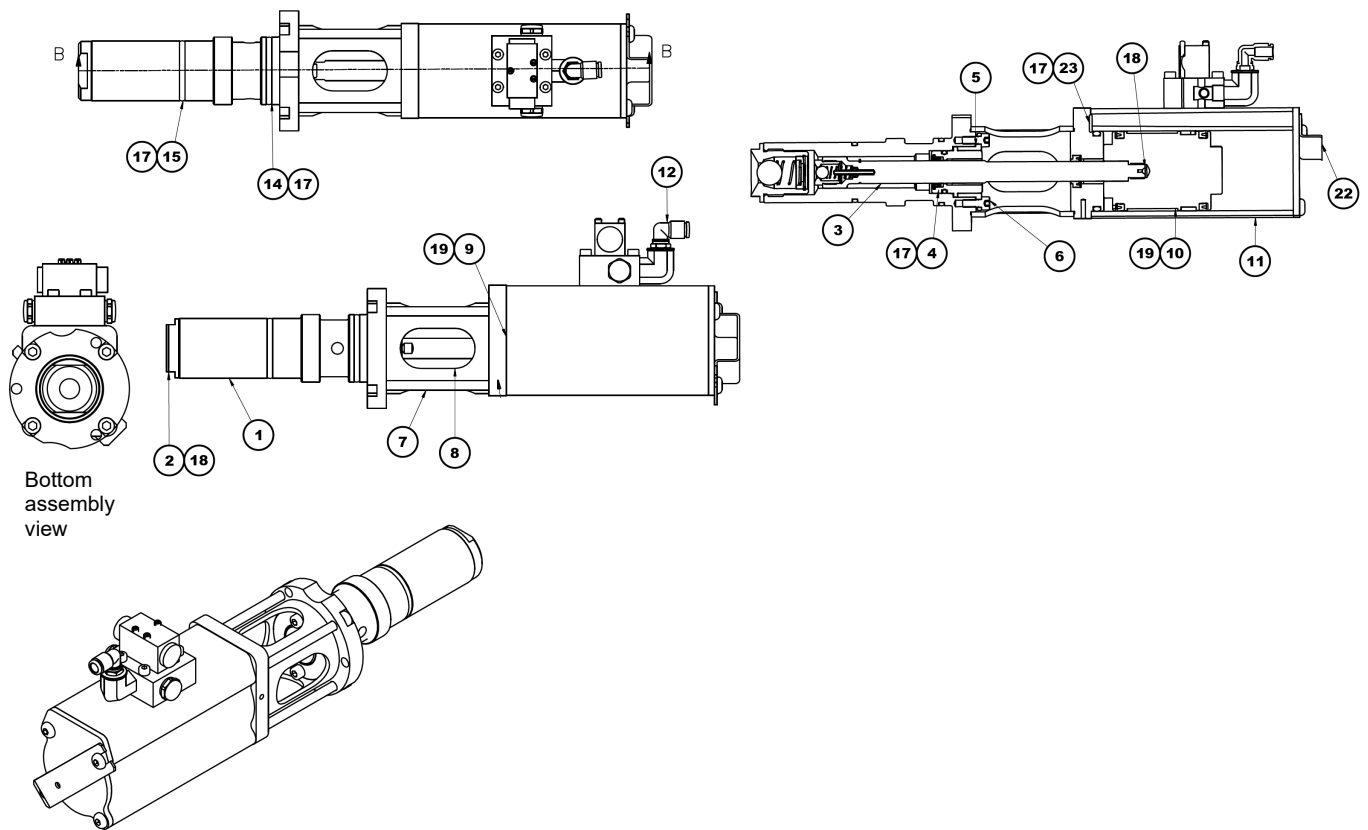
Pneumatic Piston Pump Assembly, PN 150039
